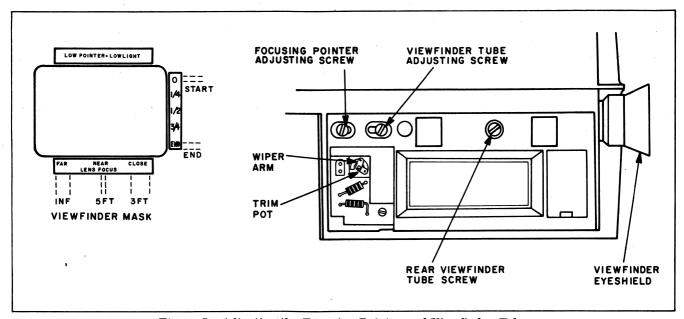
Figure L. Adjusting the Focusing Pointer and Viewfinder Tube
